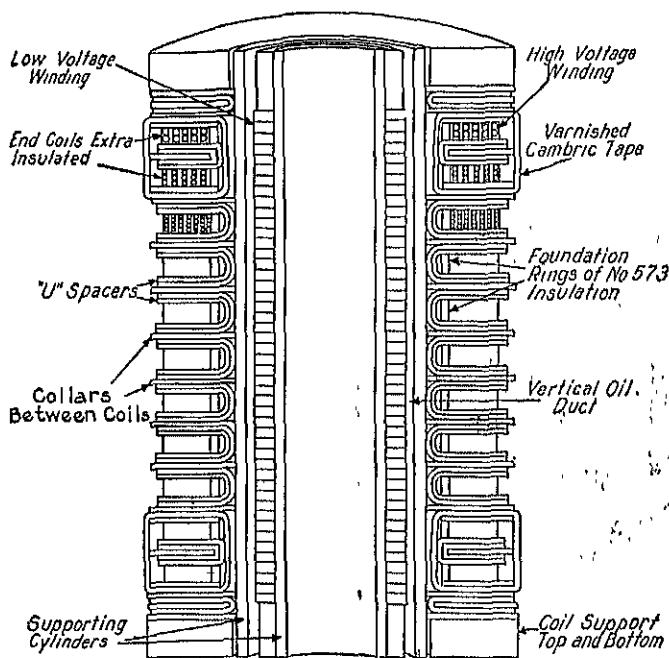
Section of concentric type winding with disc type high-voltage coils.
